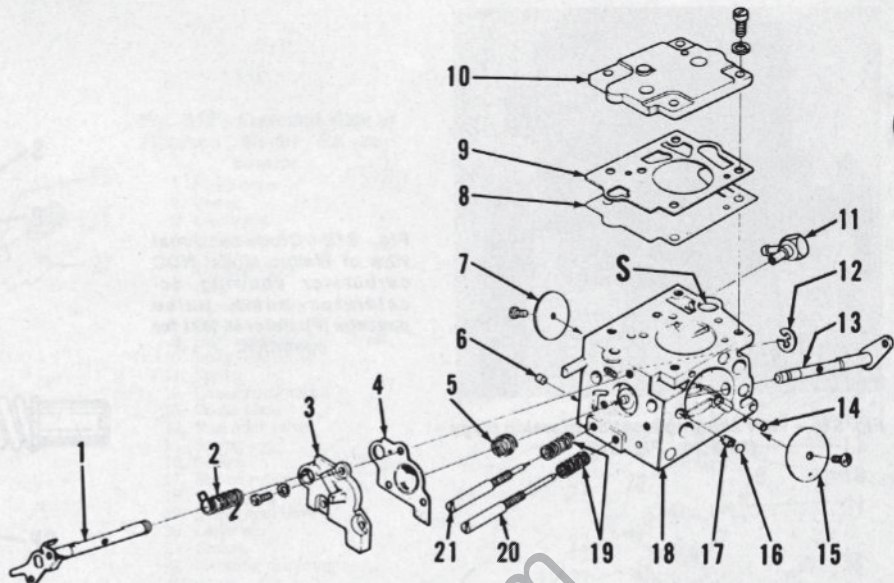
Exploded view of Walbro Model SDC carburetor with accelerator pump assembly. Refer to Fig. S20 for metering diaphragm assembly.
